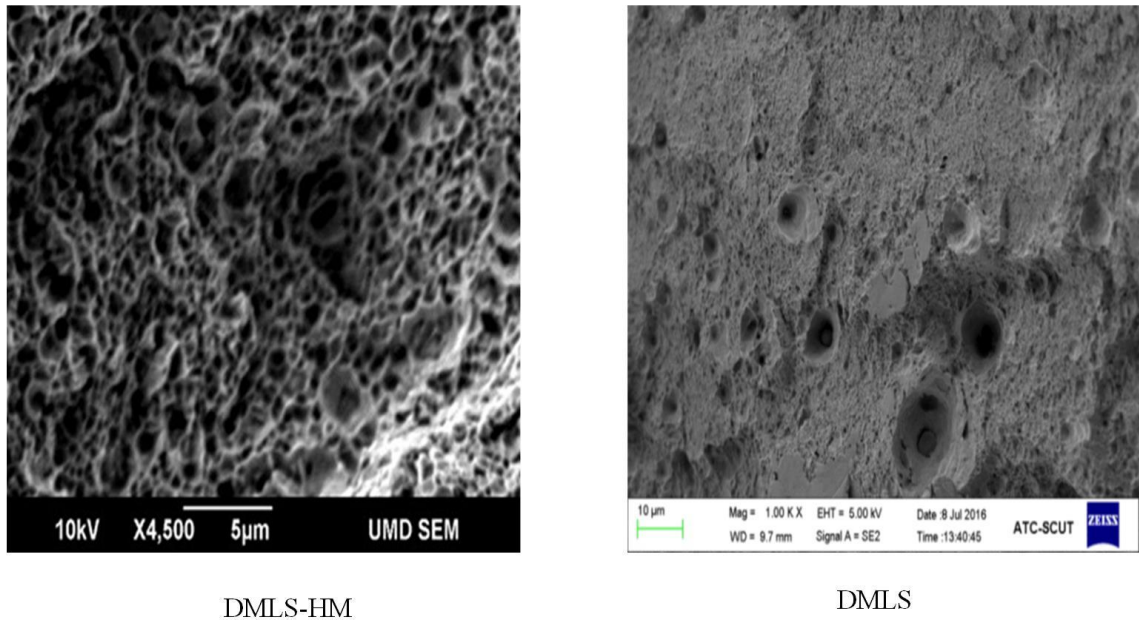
Tensile Fracture Surface morphology of Non-Age Hardened MS 300
